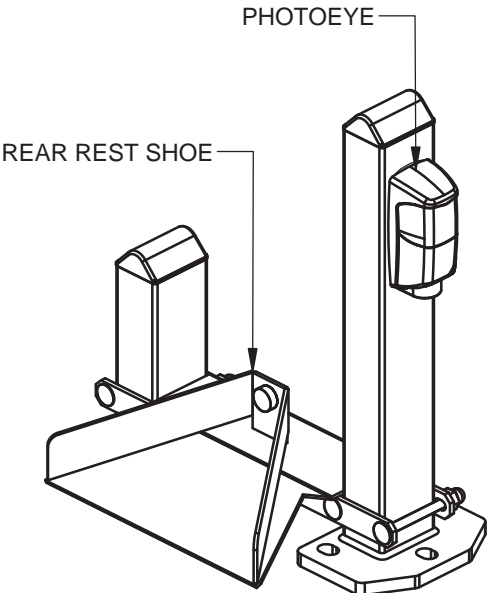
B - GATE CATCH SHOE / RUN ON PLATE
